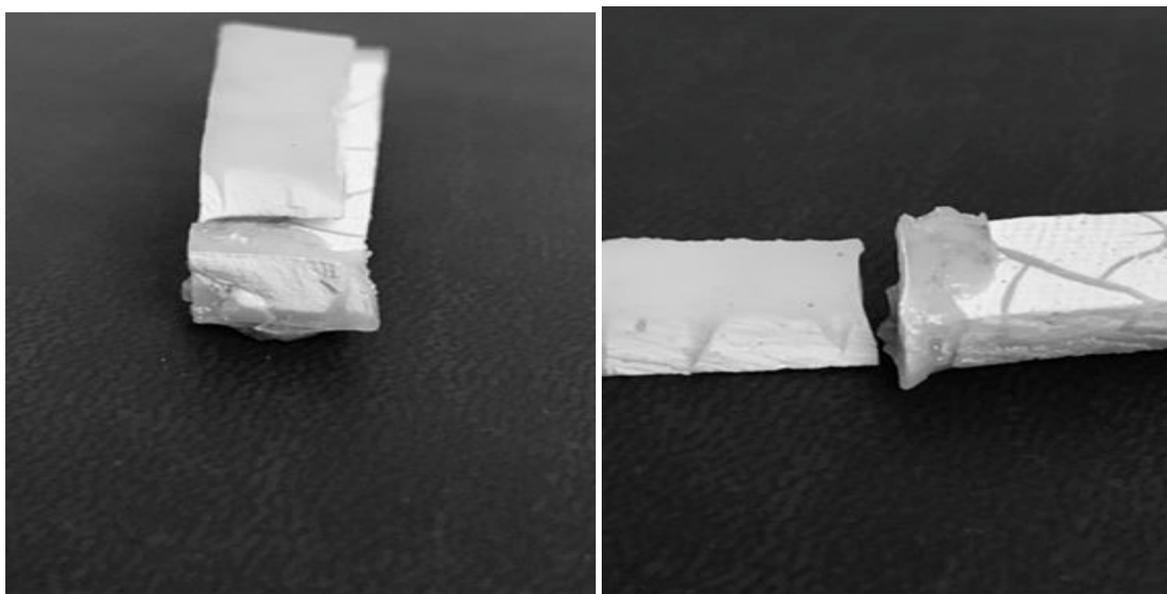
PHB welded specimens destroyed during the tensile tests.
